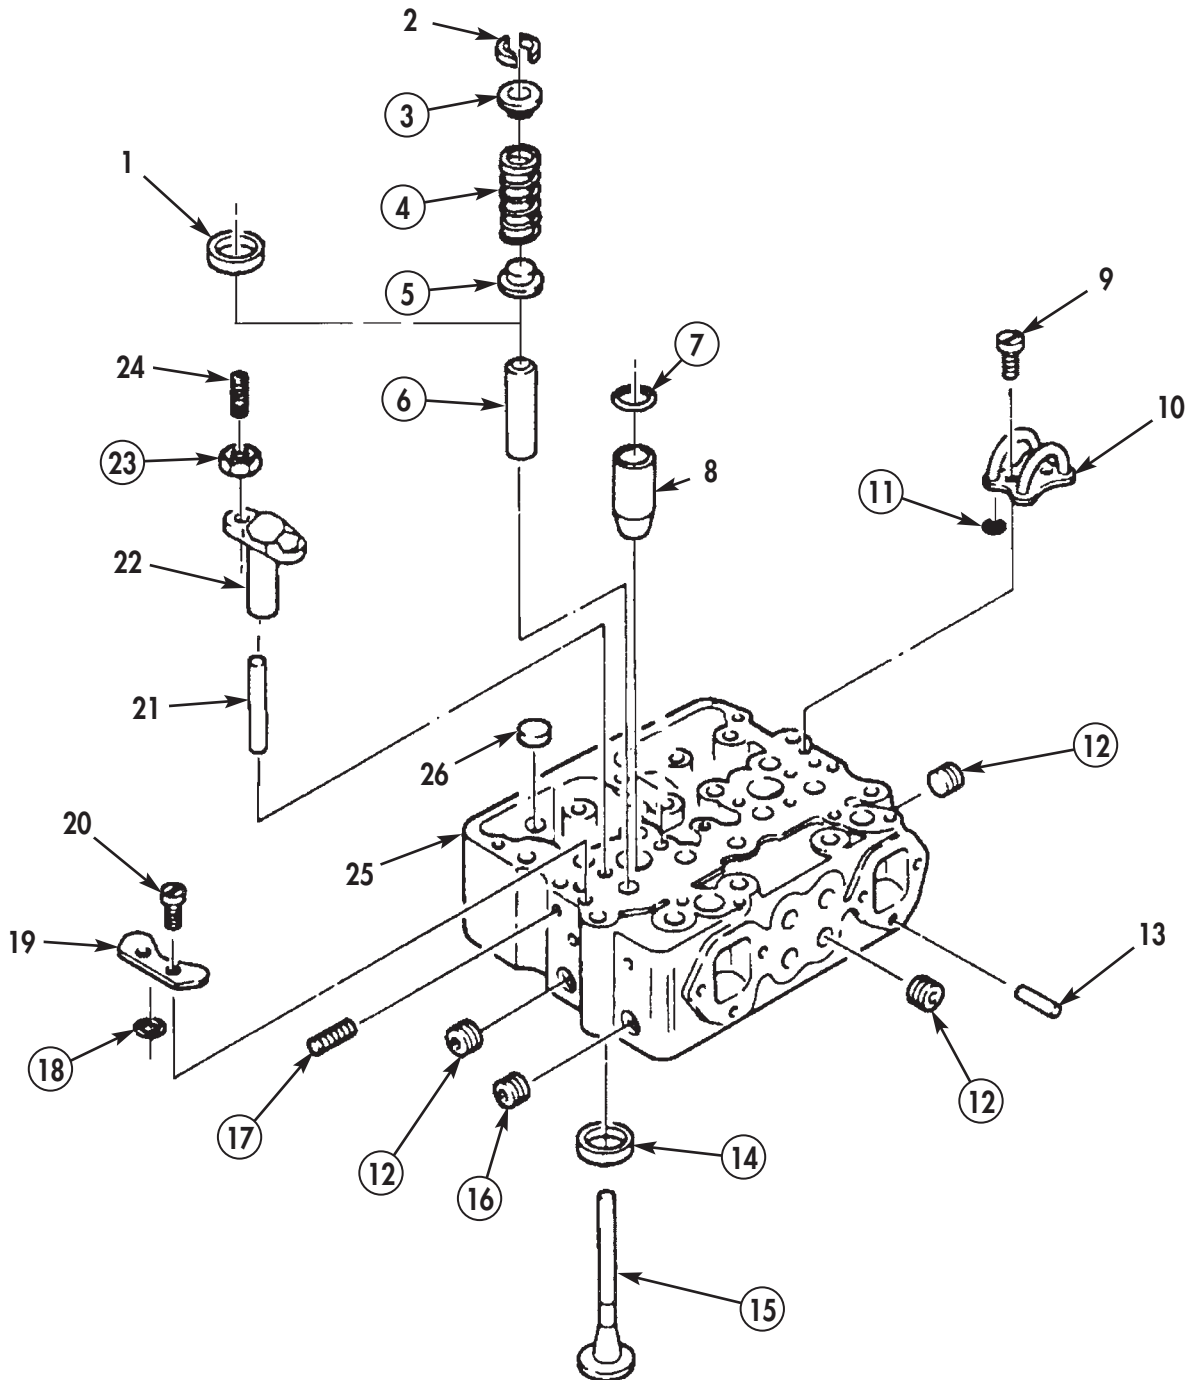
Cylinder Head Disassembly and Cleaning and Inspection.
